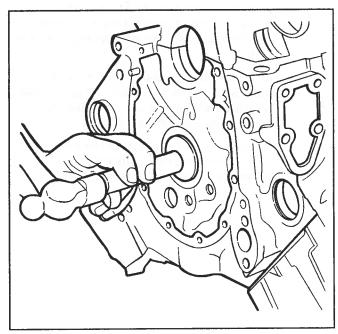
Replacing Front And Rear Camshaft Bearings
